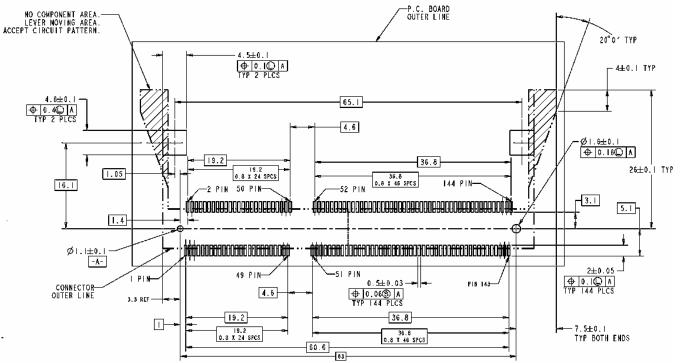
AMP/Tyco 390111-1 Recommended PCB Footprint
